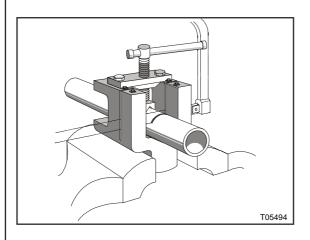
Hacksaw and saw jig for steel and stainless steel tubing
